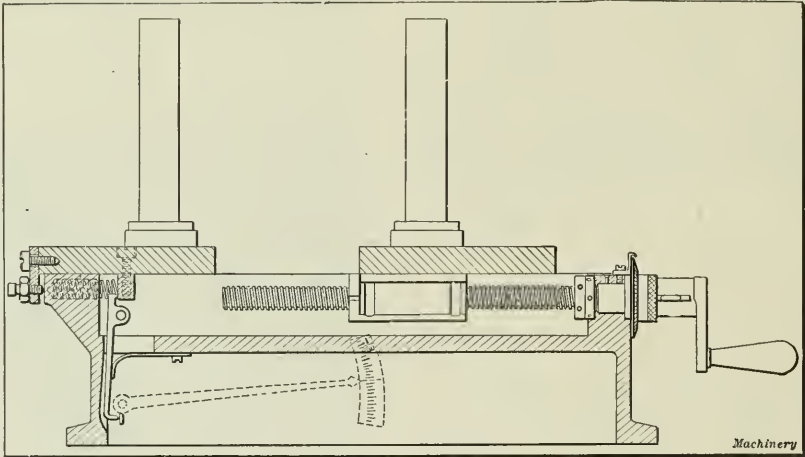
Sectional View showing Construction of Fixture shown in Fig. 10
